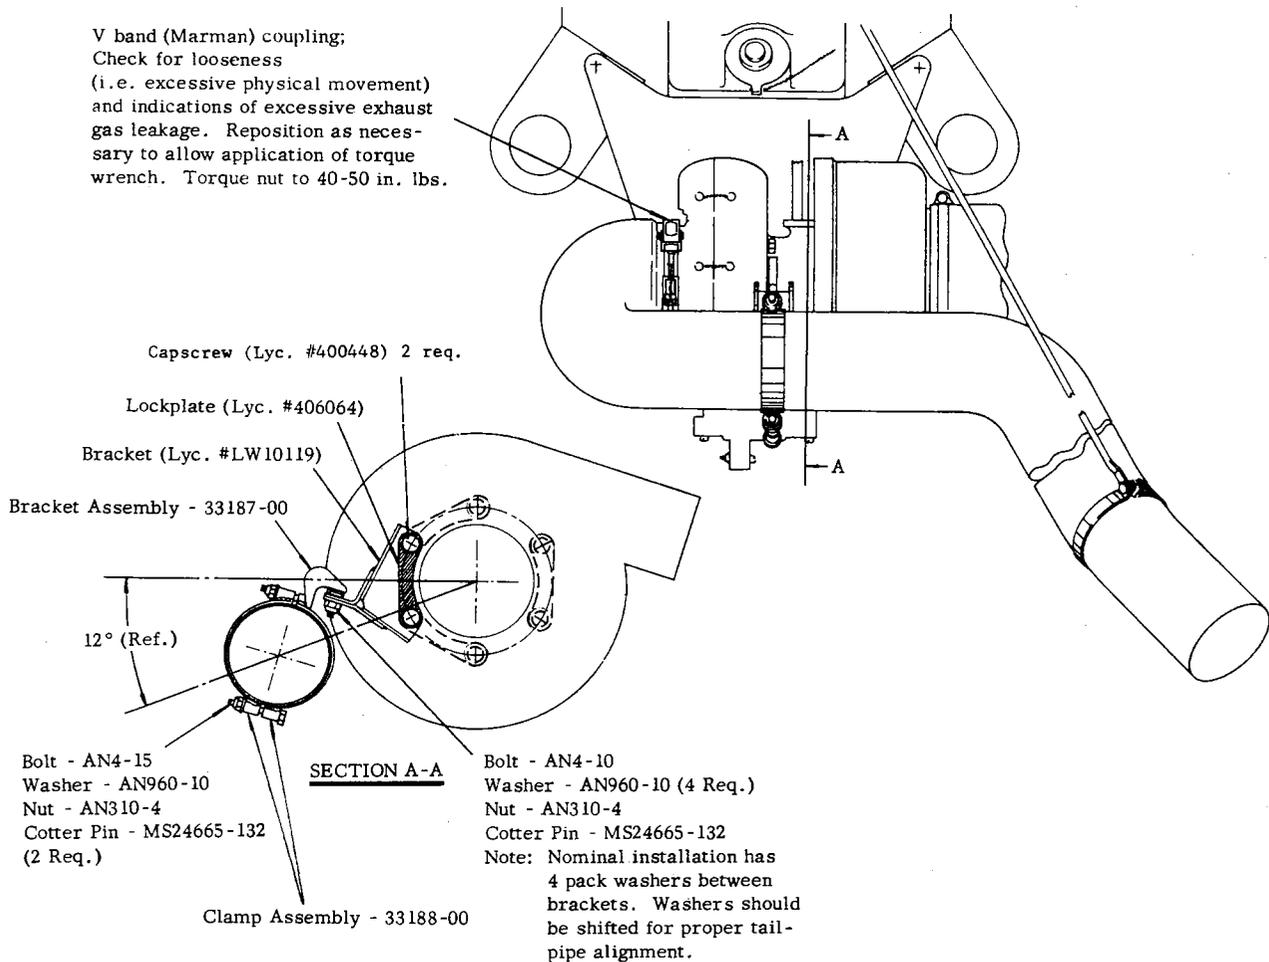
Assembly Procedure for Tailpipe Bracket and Clamp Components
